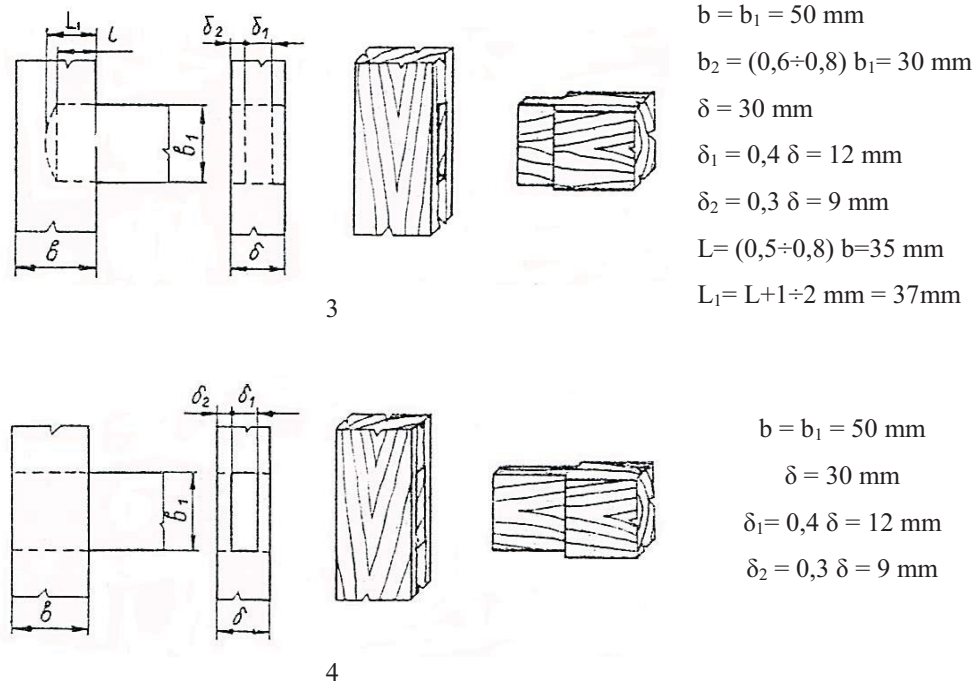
T-shape corner mortise and tenon joints: 3 – blind mortise and tenon joint; 4 – through mortise and tenon joint
